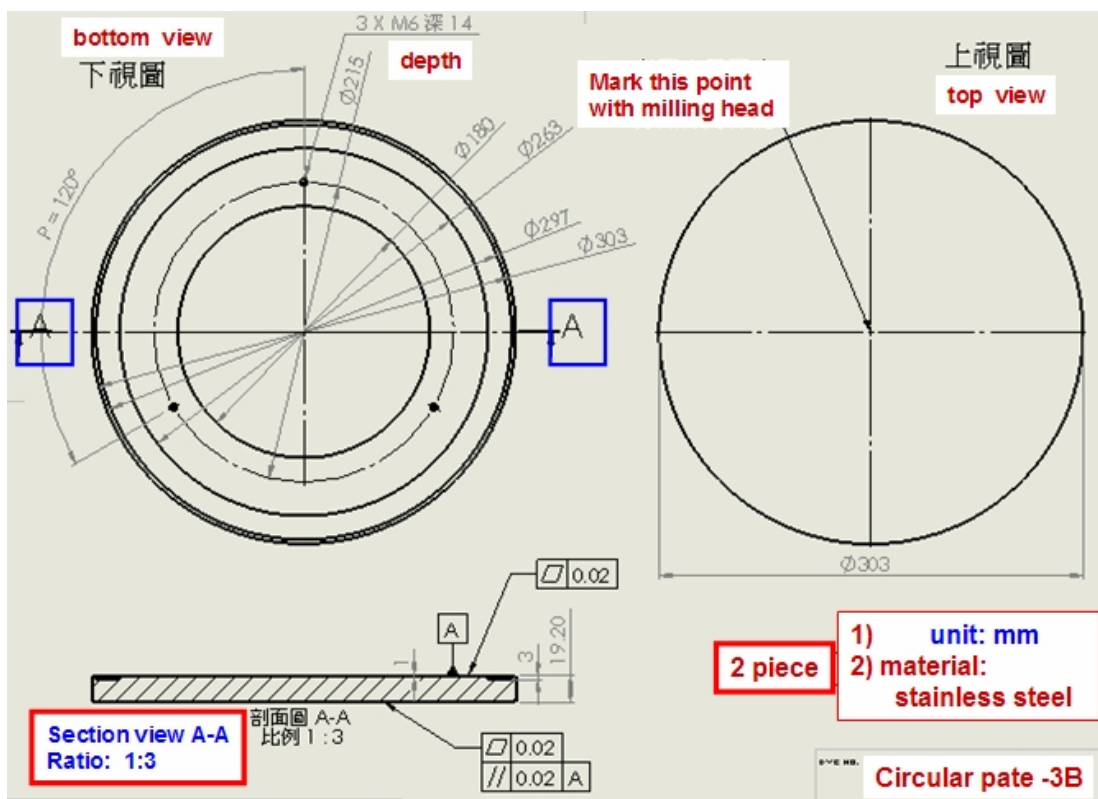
Engineering drawing of the stainless steel lapping/polishing plates we designed.
